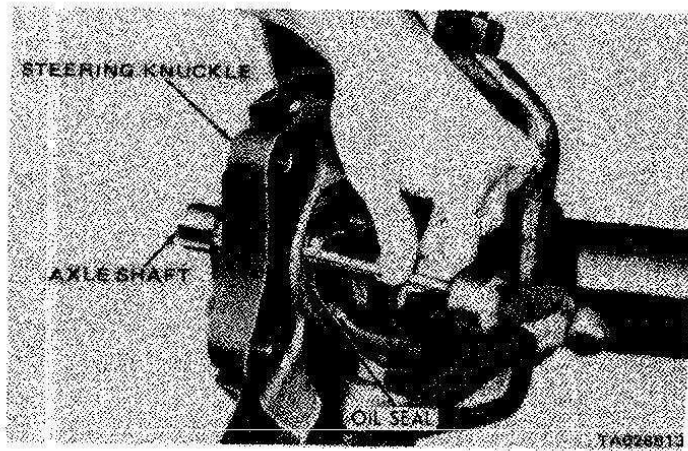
Removing Inner Oil Seal from Steering Knuckle.
